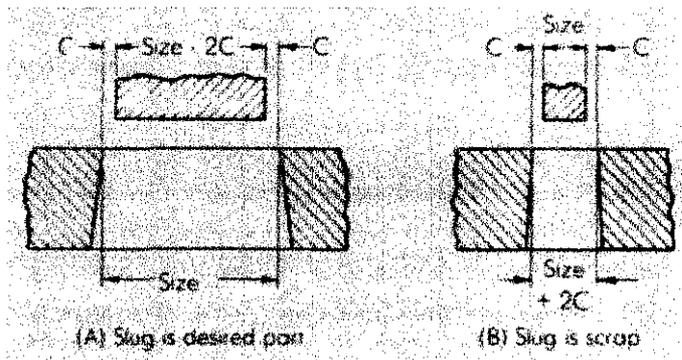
Control of Hole and Blank Sizes by Clearance Location [3]
